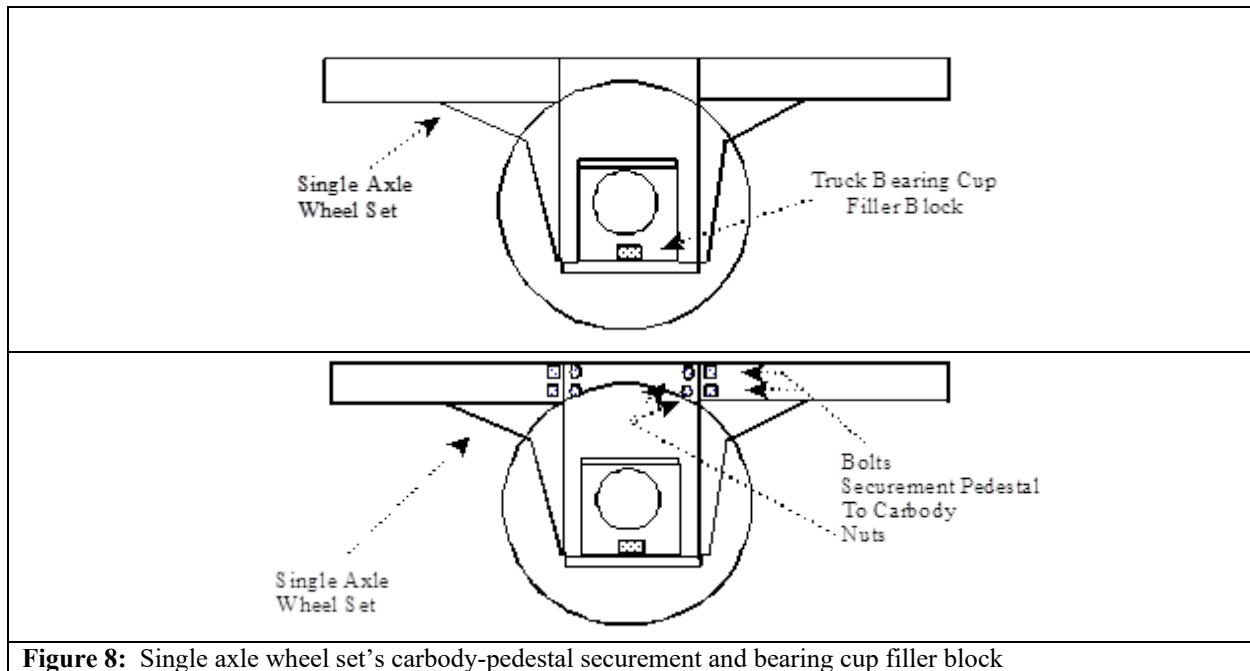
Single axle wheel set's carbody-pedestal securement and bearing cup filler block
